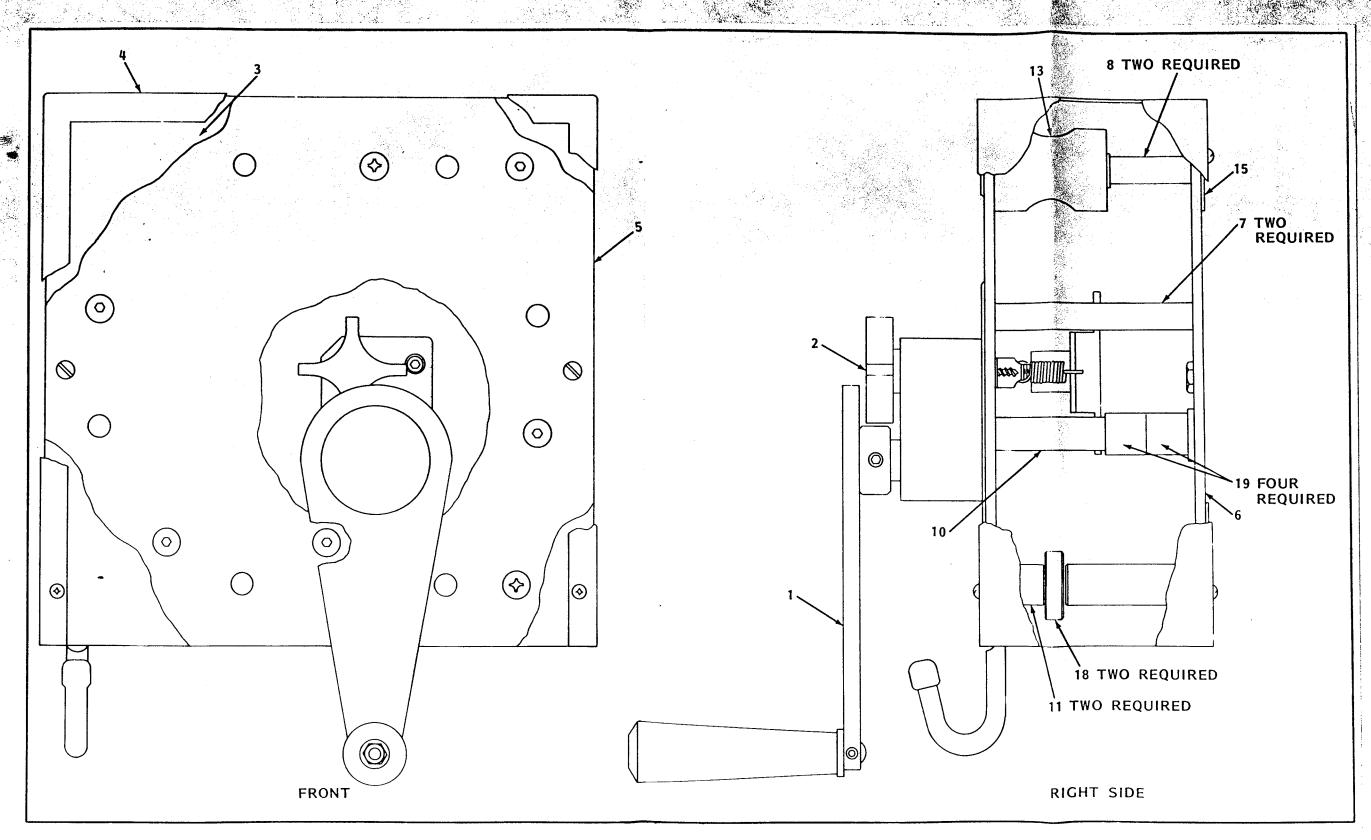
Gear Box Assembly (500023) Location of Components (Sheet 1 of 2)
